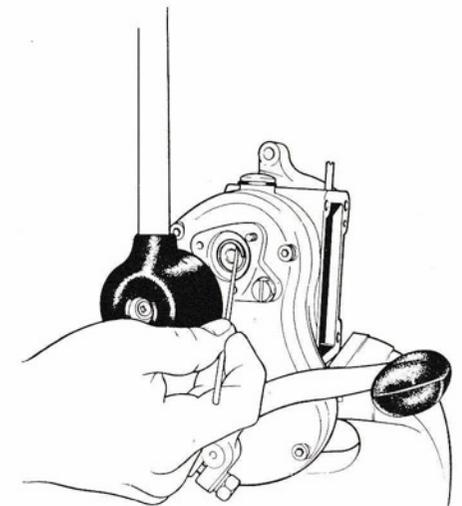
Gearbox (Transmission) end cover showing Spiralox circlip removal.
